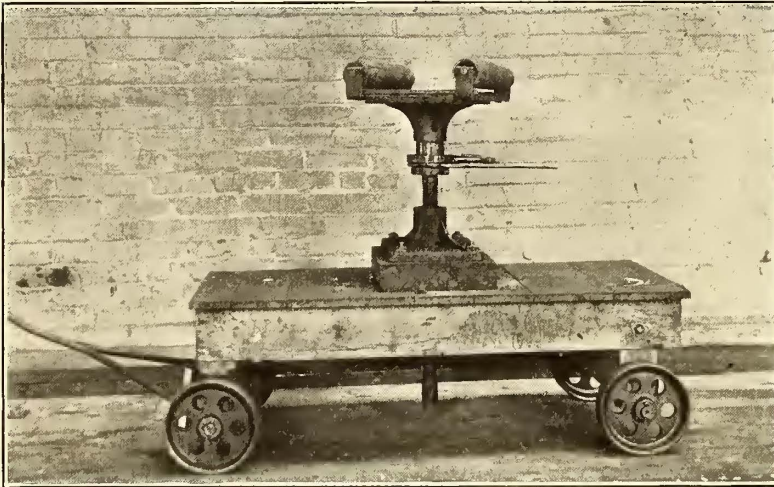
ARMATURE HOIST WITH ROLLERS ON TABLE
